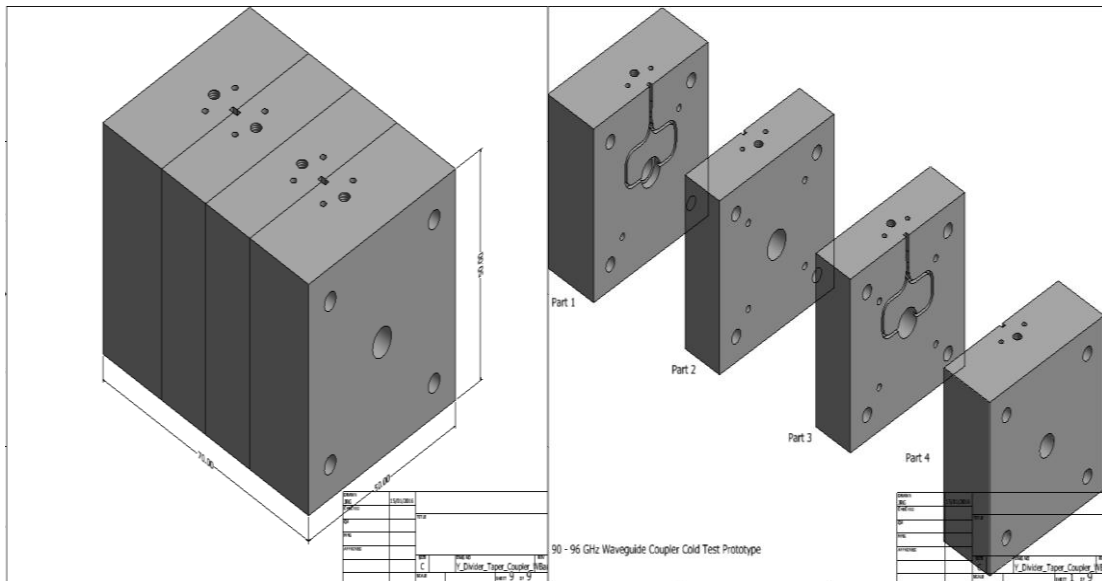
Technical drawing of 4-part TE_{61} coupler with a power splitting waveguide taper.
